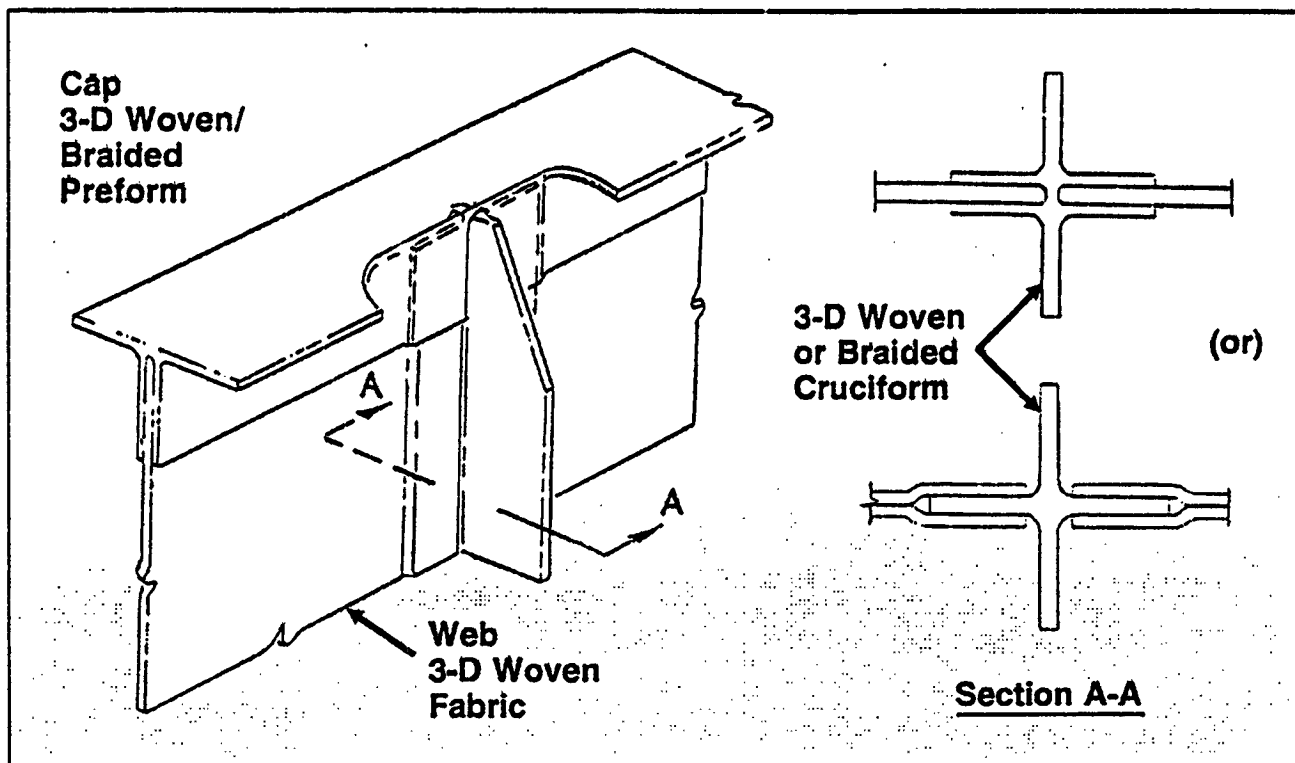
Configuration for Underfloor Frame Built with Woven and Braided Preforms
